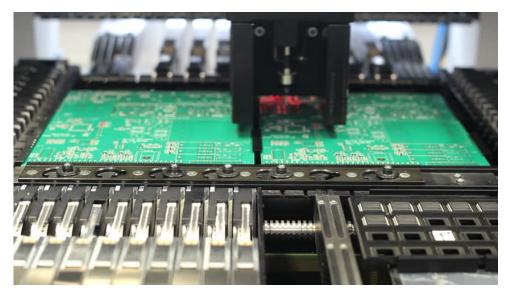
Placement head of a pick and place machine on the PCB
